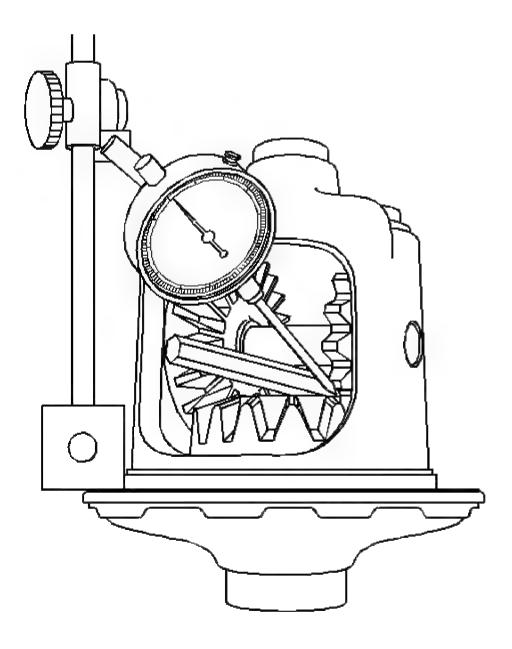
Measuring Backlash Of Pinion Gear & Side Gear Courtesy of GENERAL MOTORS CORP.
